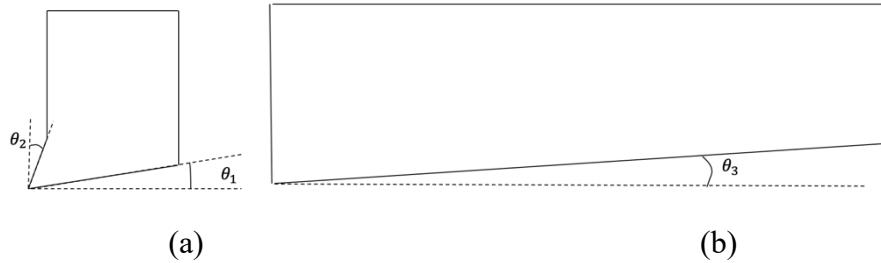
Schematic of upper tool (a) side view of upper tool (b) front view of upper tool
